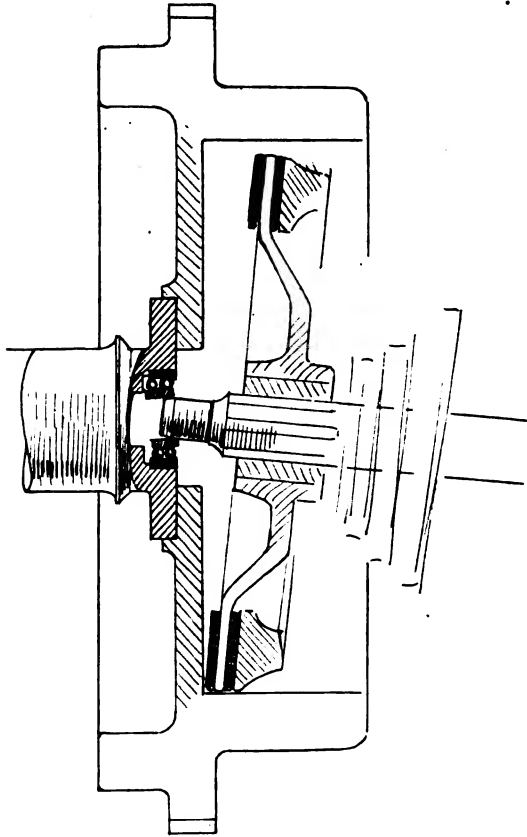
IT IS DIFFICULT TO INSERT THE SELF-ALIGNING BEARING USED ON THE CLUTCH PILOT SHAFT BECAUSE THE BEARING TILTS IN THE FLYWHEEL
